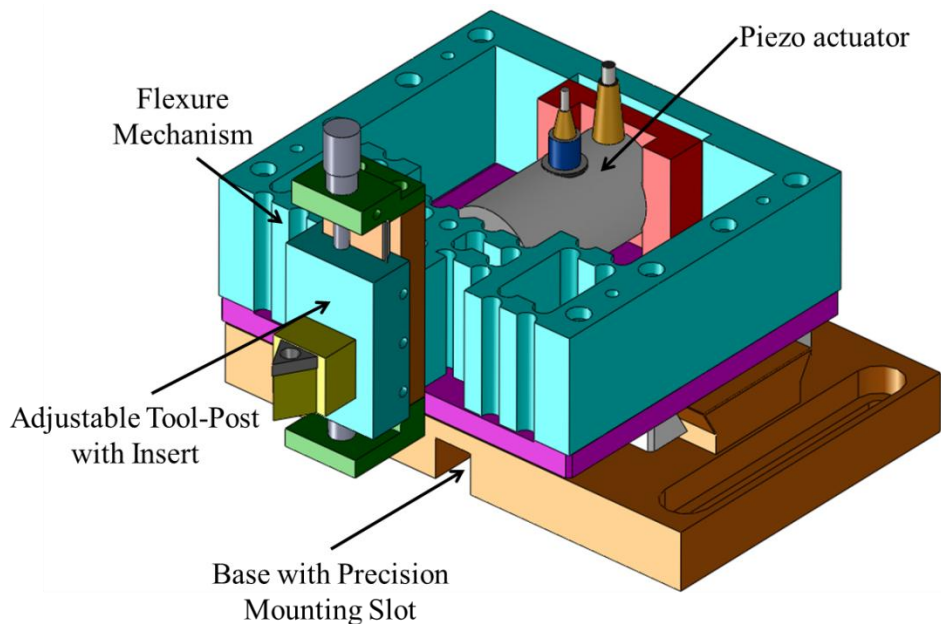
Flexure mechanism with PZT actuator and Tool-post assembly
